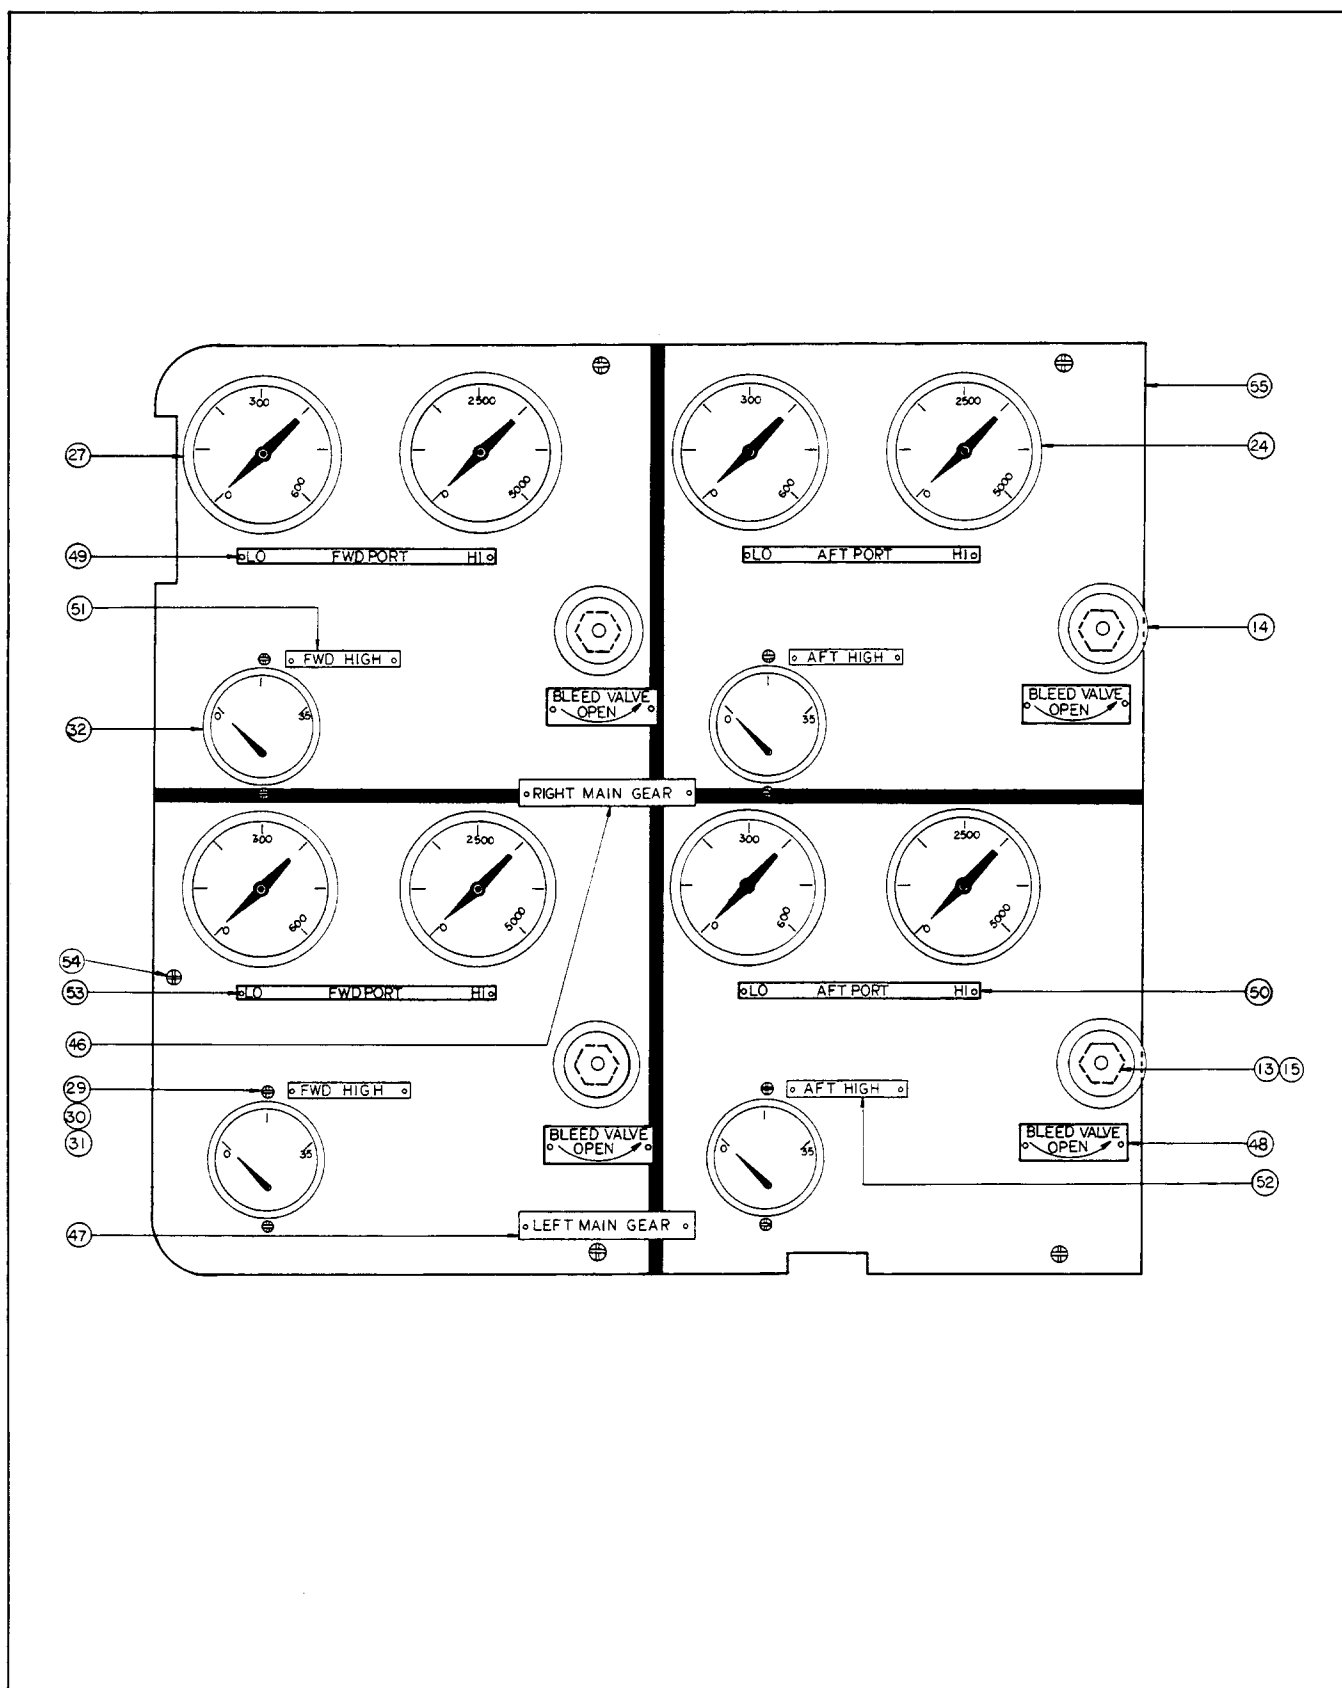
Panel Assembly (Sheet 1 of 3)
